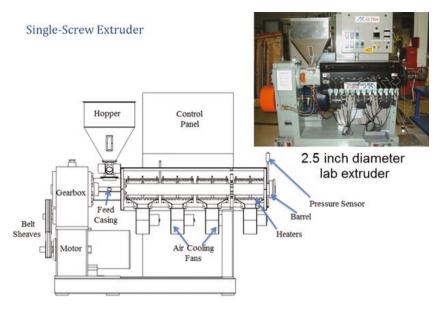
Typical single-screw extruder (courtesy of G.A. Campbell and M.A. Spalding, *Analyzing and Troubleshooting Single-Screw Extruders,* 2nd ed., Hanser (2021))
